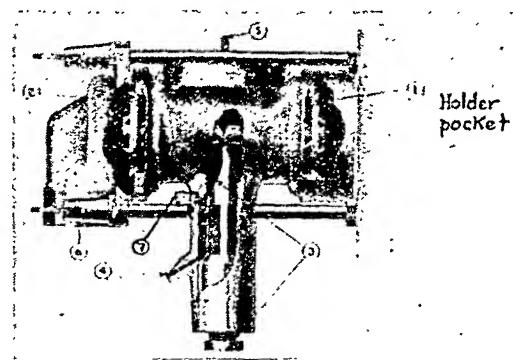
FIG. XII—Showing leak protector inlet and outlet valve for automatic pocket holders—(1) valve from holder pocket; (2) outlet header valve; (3) operating stem; (4) leakage drain; (5) removable cap; (6) connection to outlet header; (7) steam connection.
